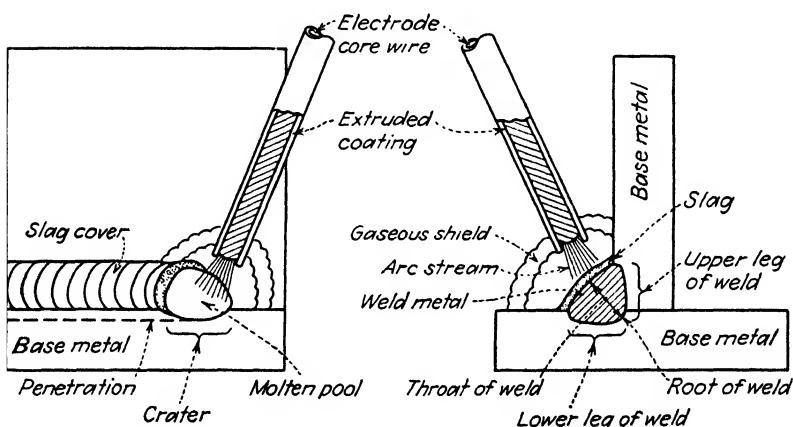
An elementary diagram showing the materials and functions involved in making a fillet type joint by arc welding.
